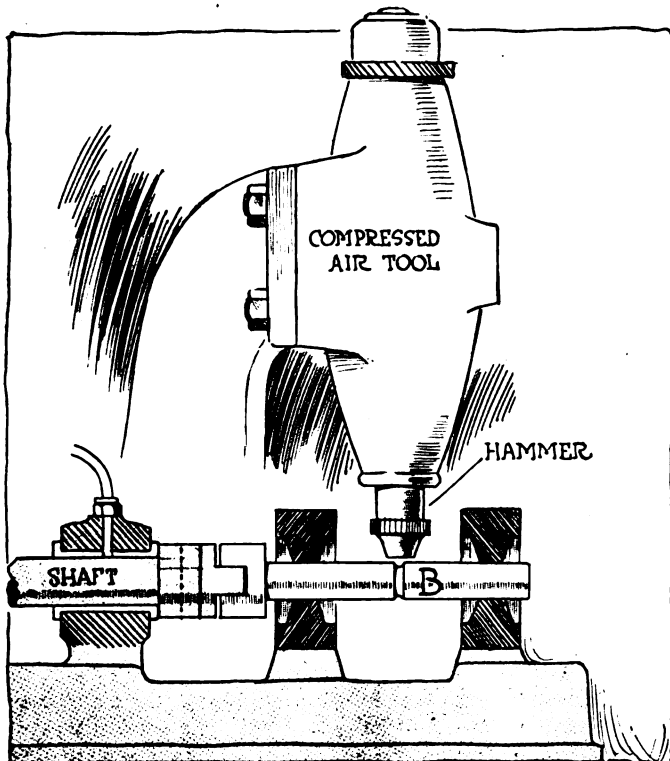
Compressed air tool for use by workman in shop testing of steel to get reliable and quick results
